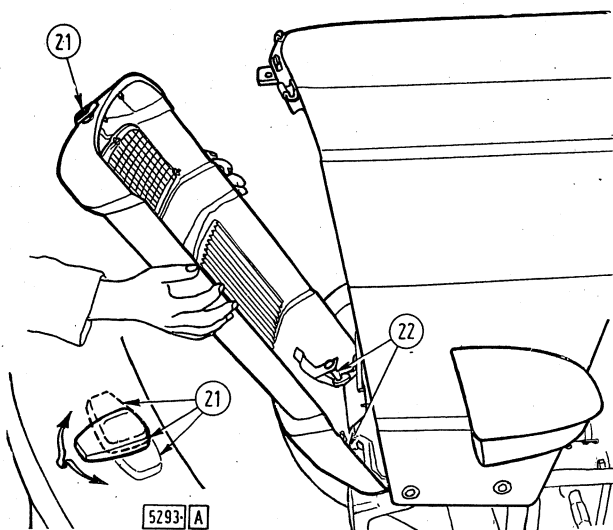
/4 - Removing the cowling after turning upper lock pin (21) and withdrawing the pins (22) from the lower support.
